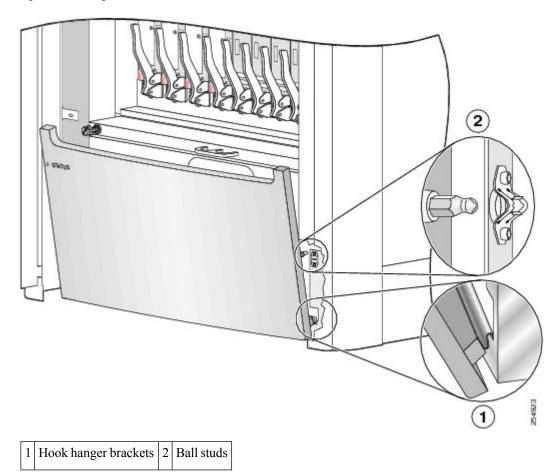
Attaching the Lower Chassis Cosmetic Bezel
